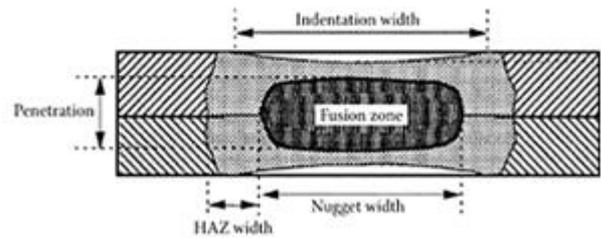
Weld attributes revealed by metallographic sectioning
